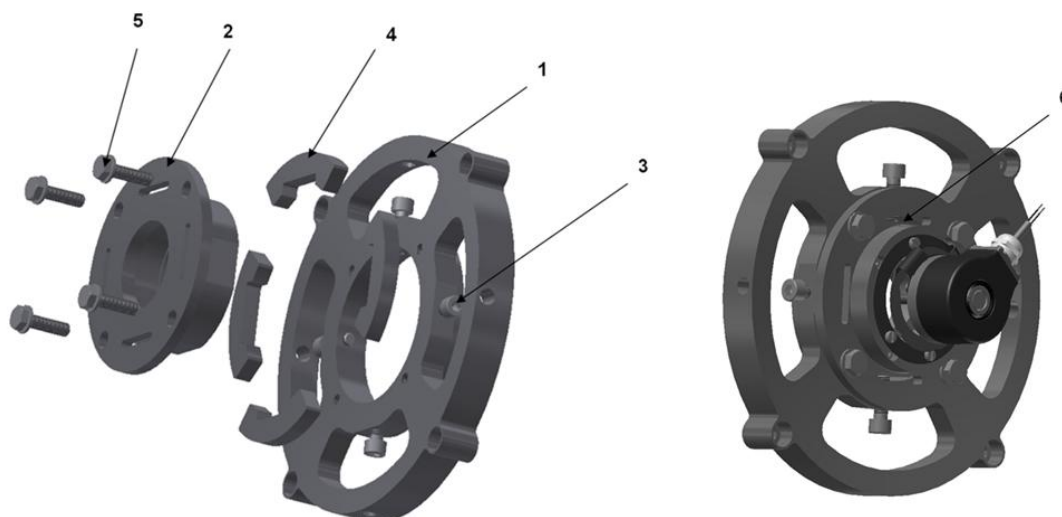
Components of adjustable motor's bearing disc: 1- main disc, 2 - a mobile hub, 3 - adjusting screws, 4- washers, 5 - locking screws, 6 - encoder's adapter.
